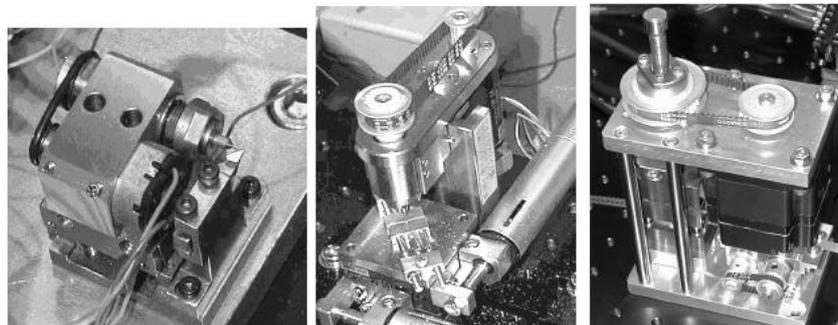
Constructed 5-axis milling machine (Bang *et al.* 2005).
